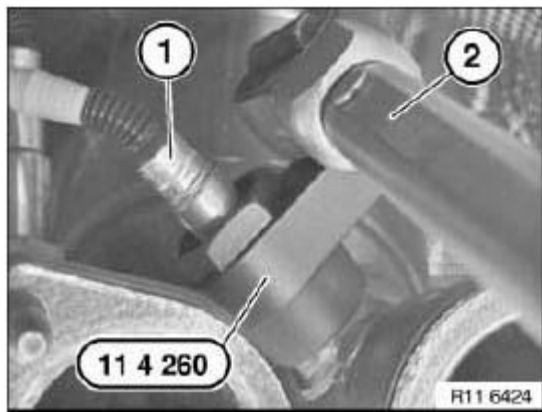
Identifying Special Tool (11 4 260) And Monitor Sensor
